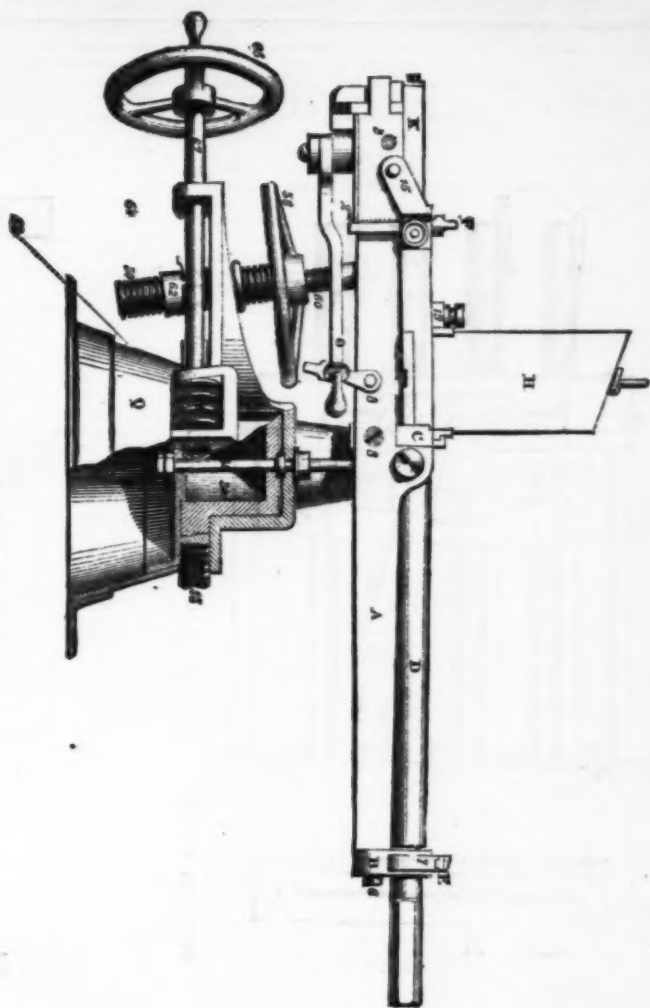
ELEVATION. (Scale of $\frac{1}{4}$ inch.)
